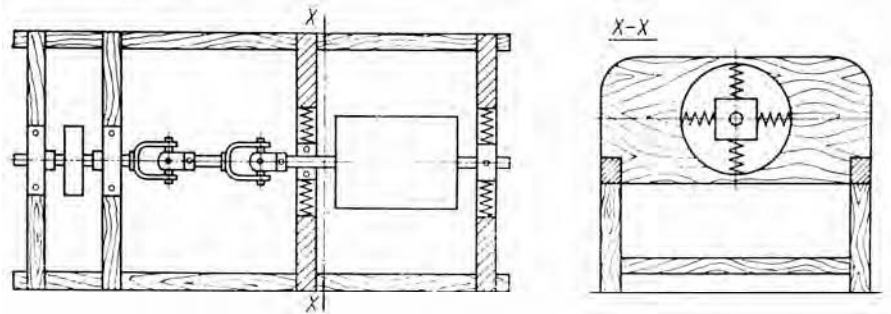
The first balancing machine built by Martinson in 1870 [LAC 79]
